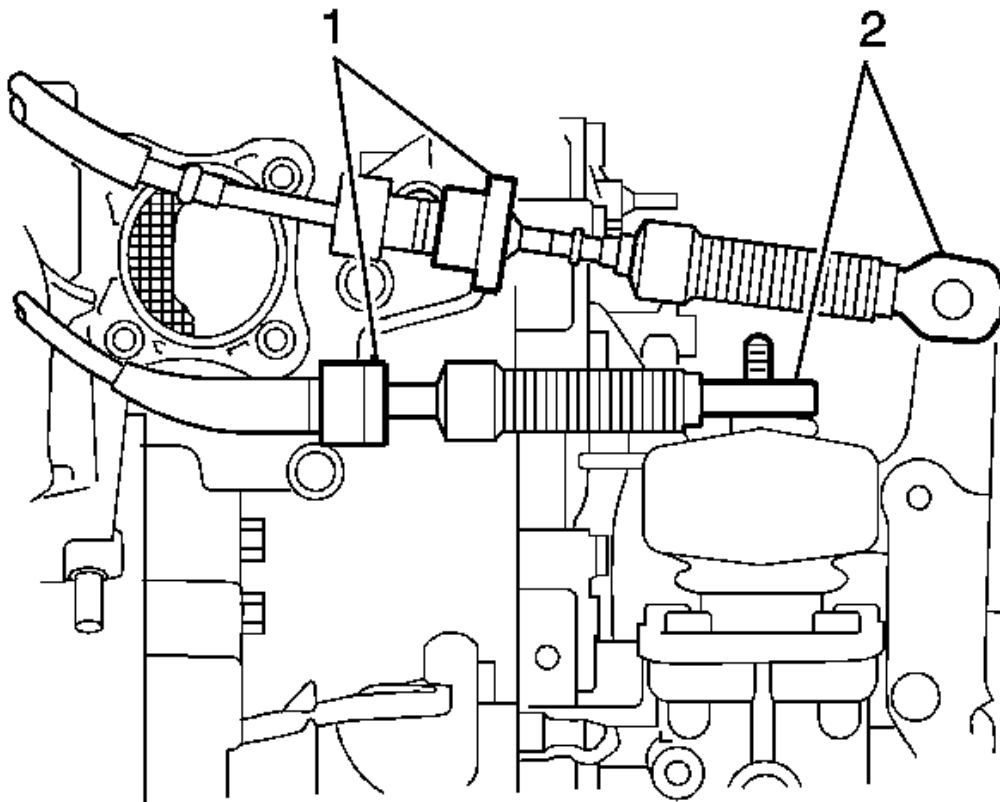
Locating Transmission Shift Lever Cables, Cable Bracket & Clips
